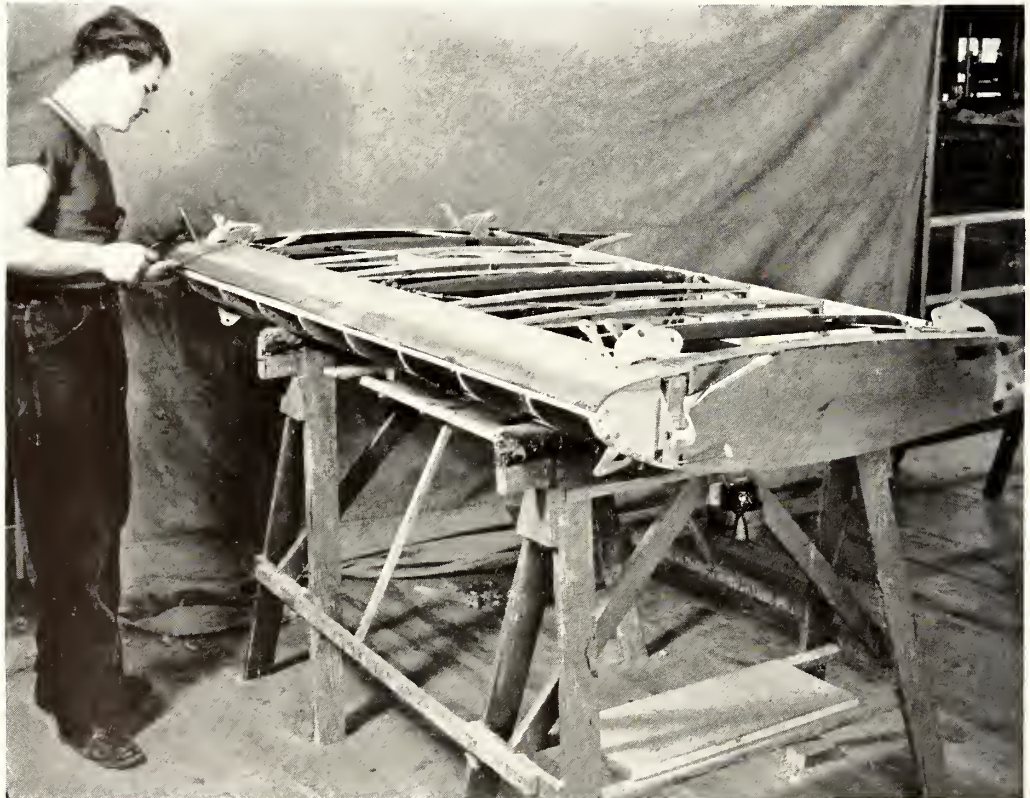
Attaching flat plywood to the leading edge of a wing section.
